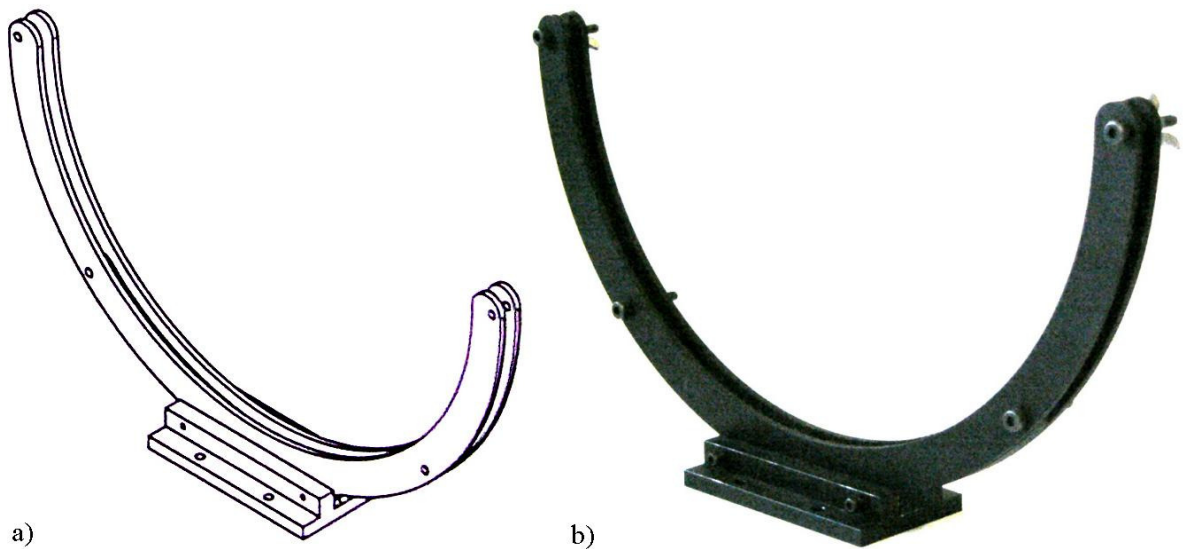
Fresnel lens support a) Drawing, b) Photograph
